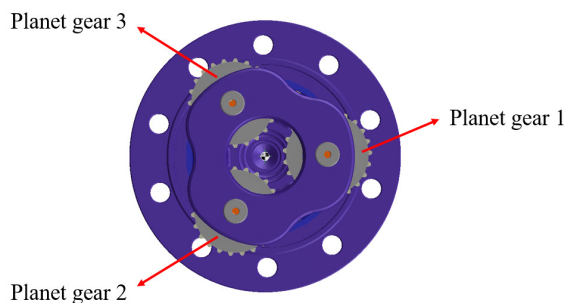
Position of planet gears in planetary gear set when the carrier rotated 0°
